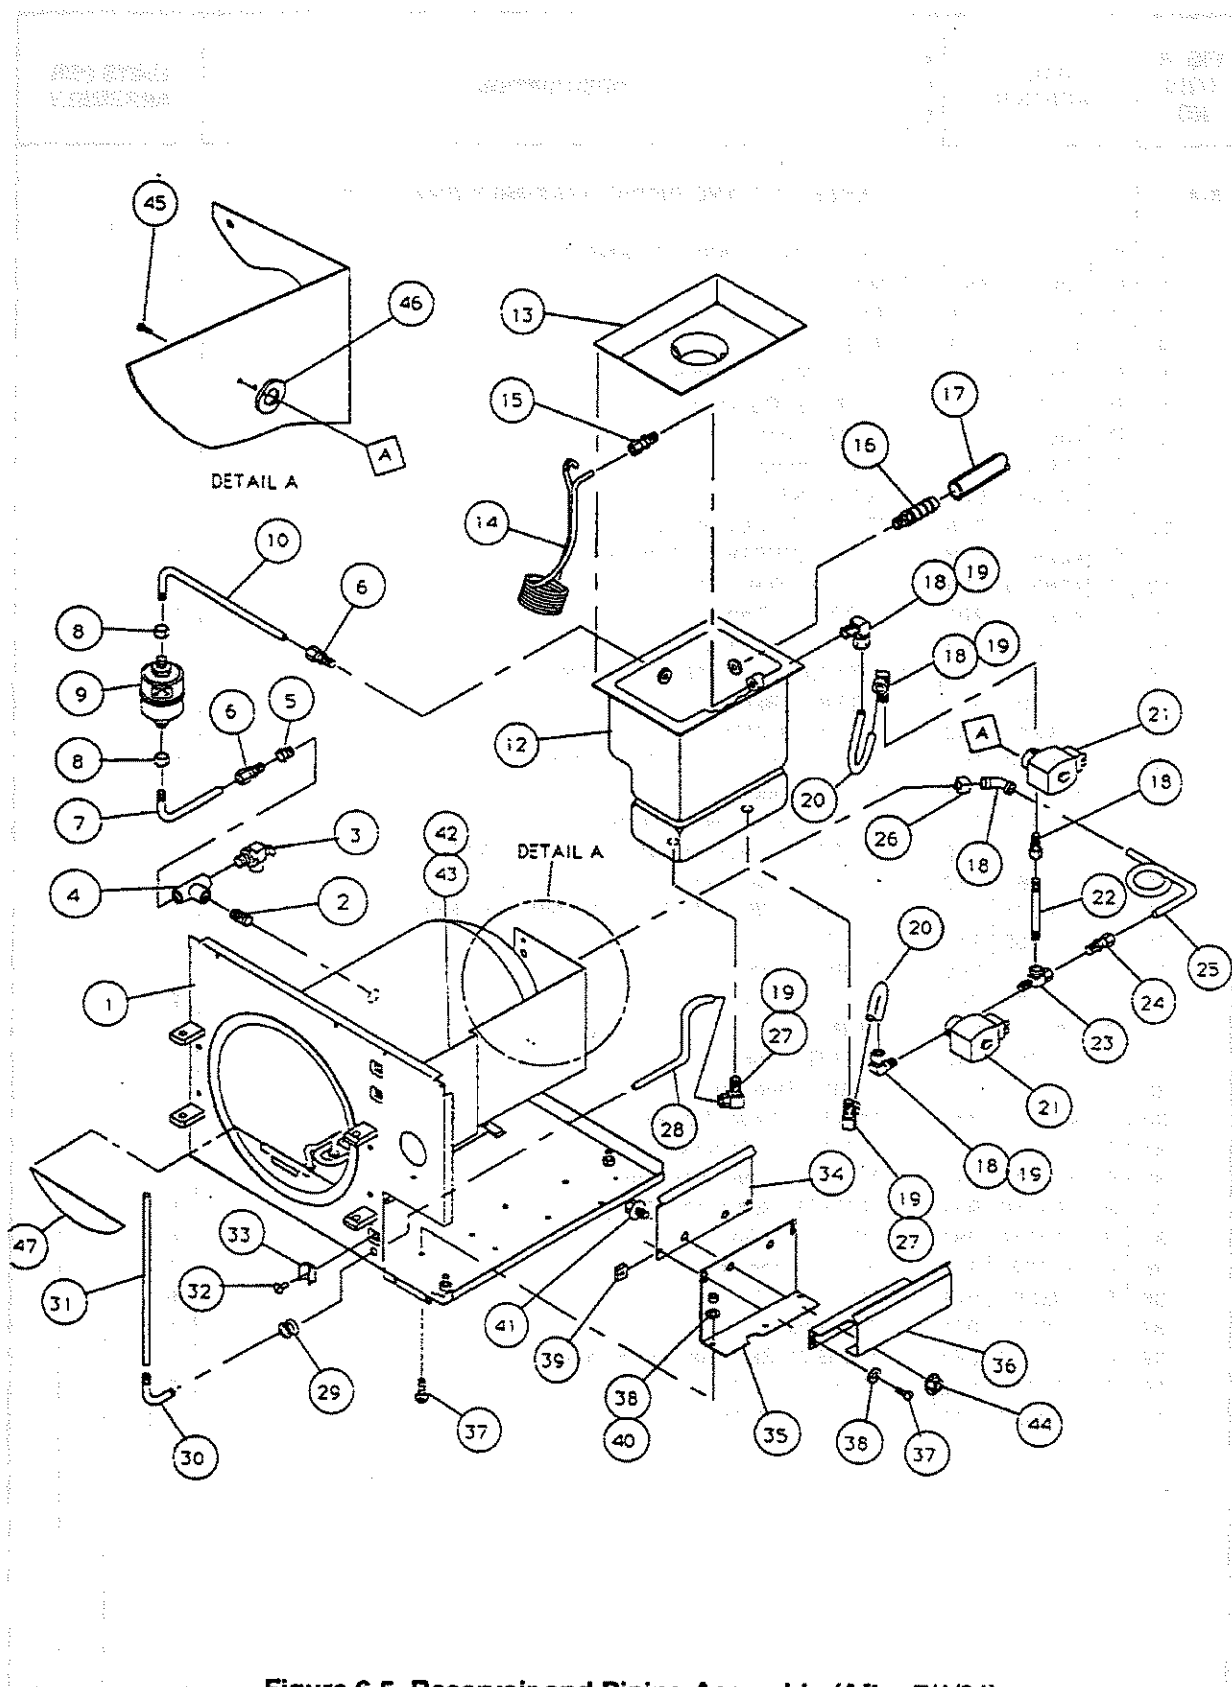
Reservoir and Piping Assembly (After 7/1/91)
